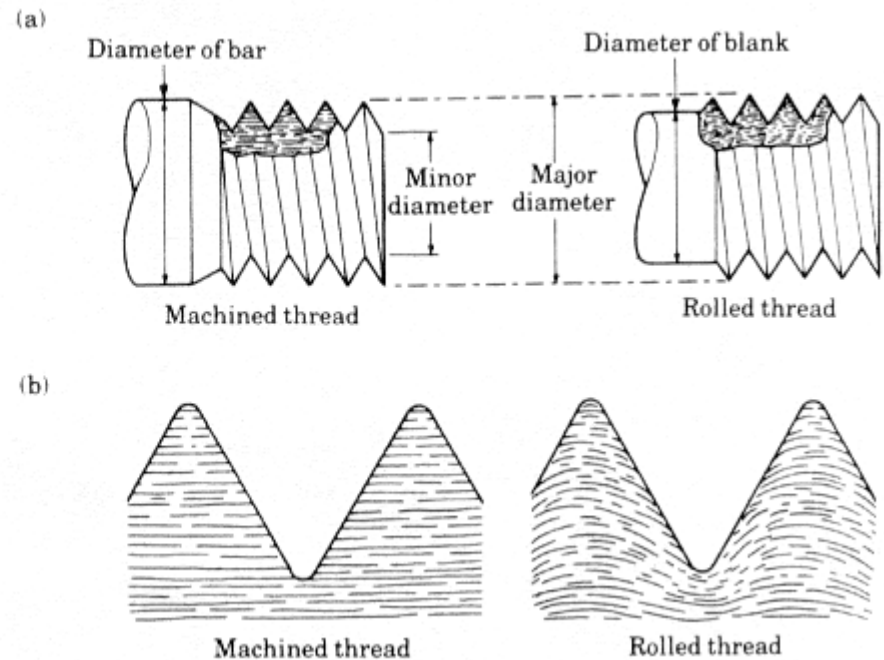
(a) Schematic illustration of machined and rolled threads. Note the increase in the blank diameter for the rolled thread. (b) Grain flow lines in machined and rolled threads. Unlike machining, which cuts through the grains of the metal, rolled threads have improved strength due to cold working.
